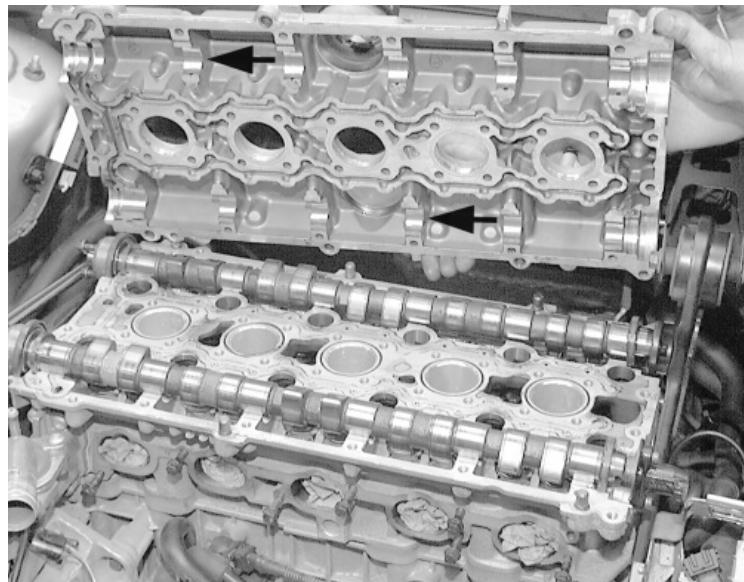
Carefully lift the upper cylinder head up and off the lower section. Note the integral camshaft bearing caps in the casting
